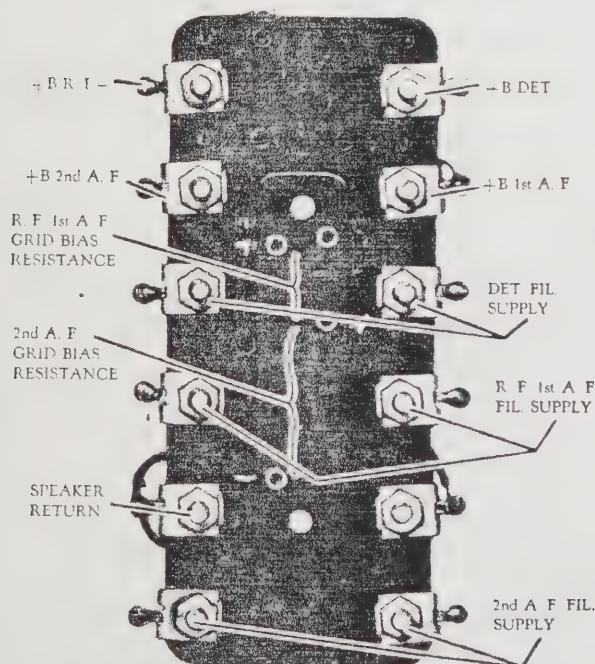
TOP VIEW OF PANEL ASSEMBLY USED IN POWER UNIT OF MODELS 40, 42, 44 AND 52
